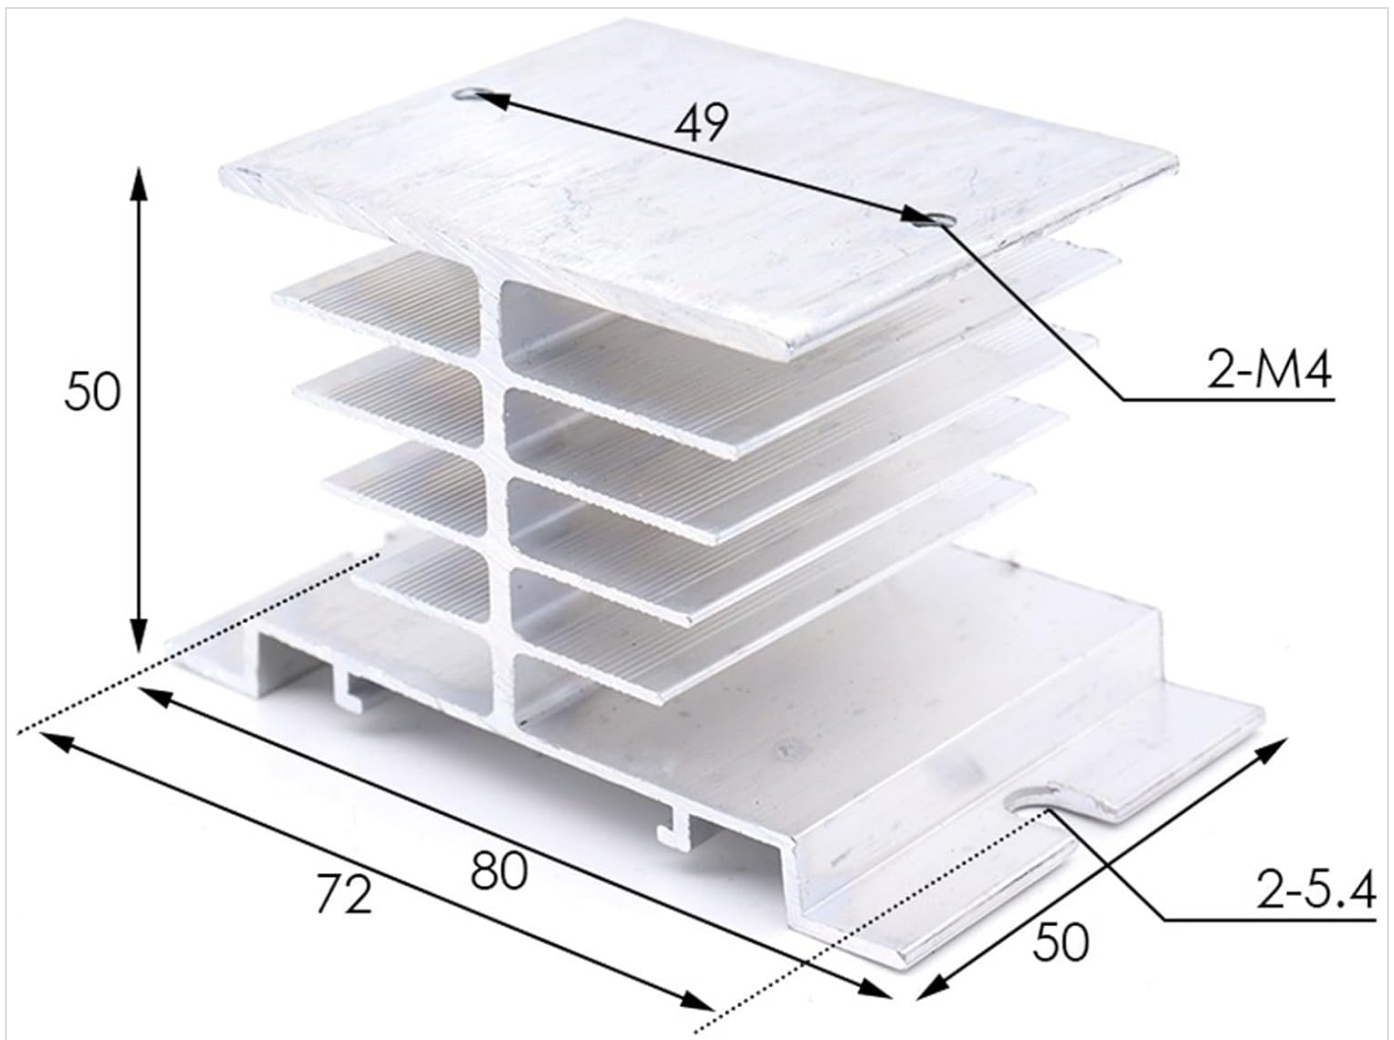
Aluminum heatsink dimensions, designed for efficient heat dissipation from the SSR.
